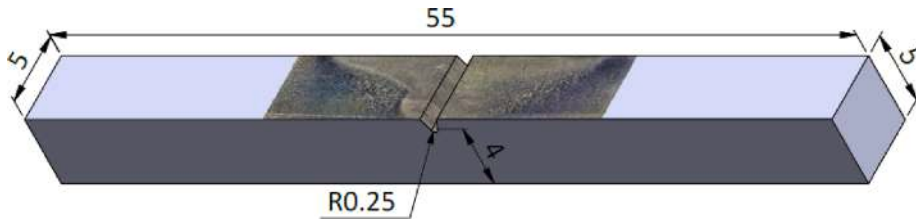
Specimens geometric dimensions of V-notch Charpy (in mm).
